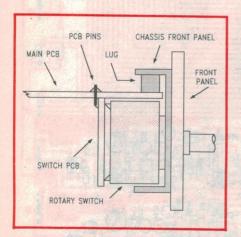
The completed PCB is a neat fit between the top panel mounting lug, and the lower edge of the chassis front panel.
